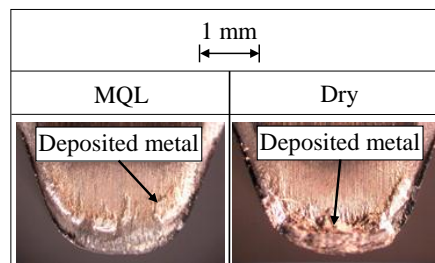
Comparison of the deposited metal between MQL and dry cutting (SCM415, HB131, M34, cutting speed: 117 m/min cutting length of groove: 0.5 m)
